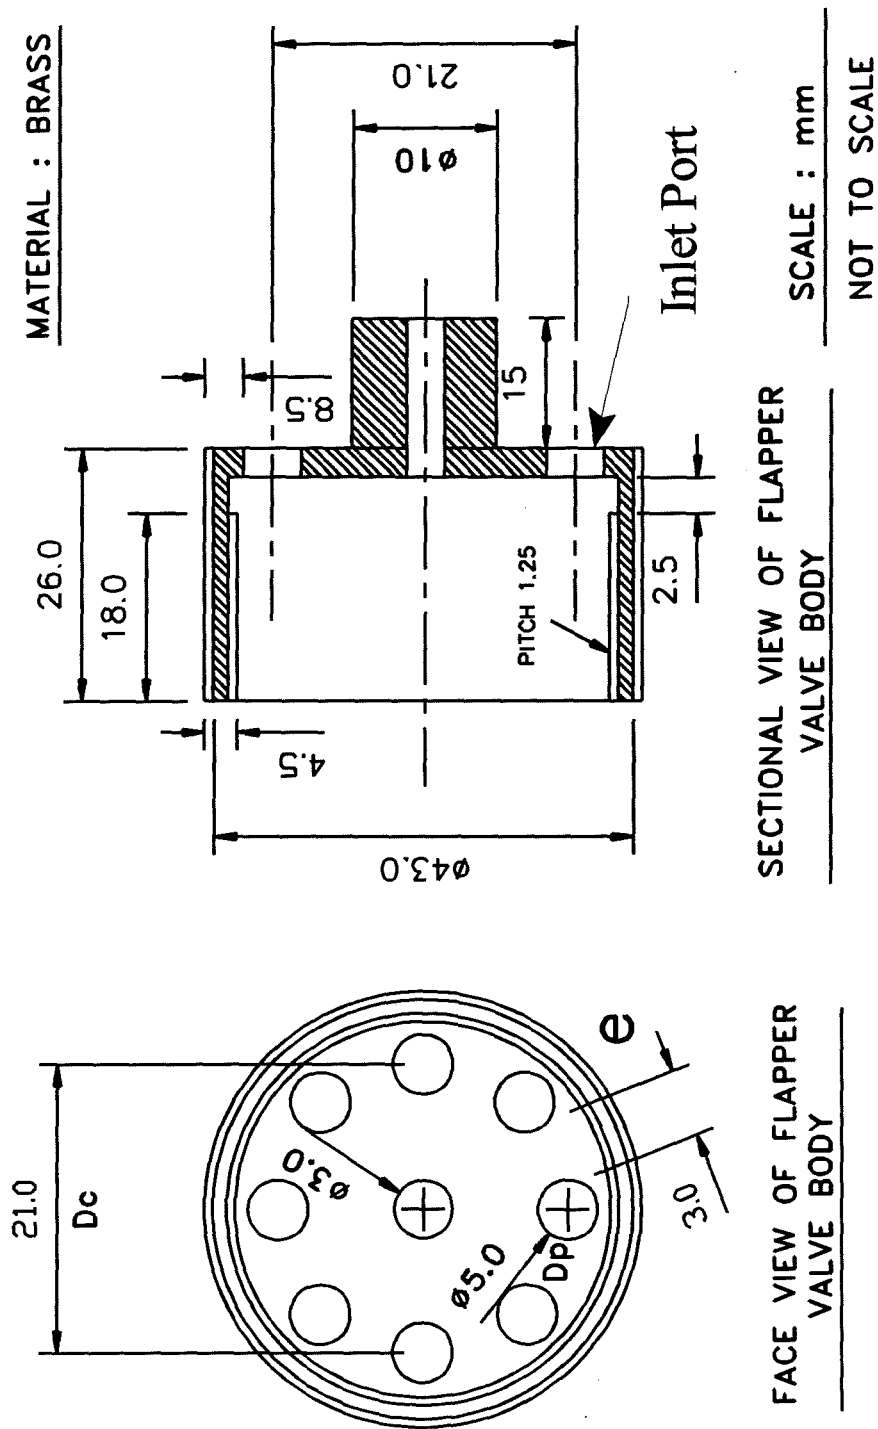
Sectional and face view of the flapper valve carrier used for the 7.5 kW combustor.
